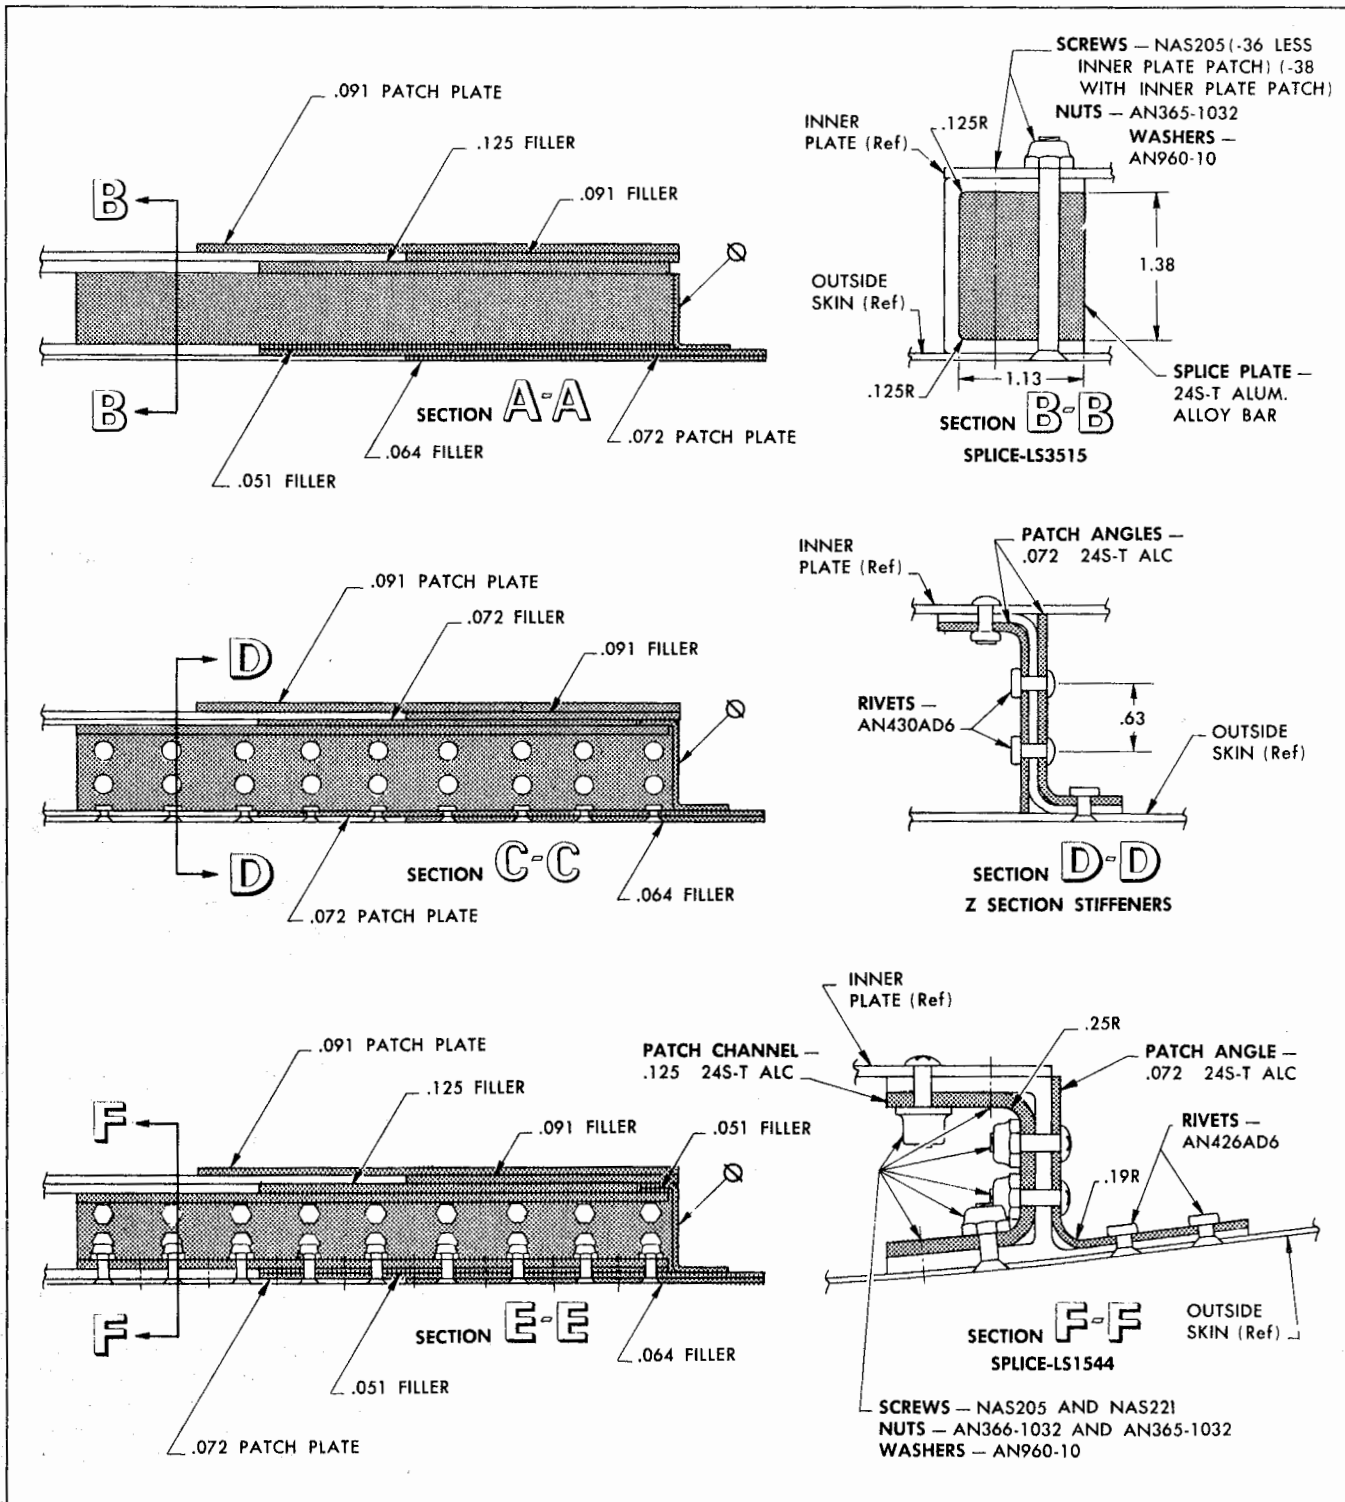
A (Sheet 2 of 2 Sheets) — Dive Flap Repair, P-80B and P-80C Airplanes
